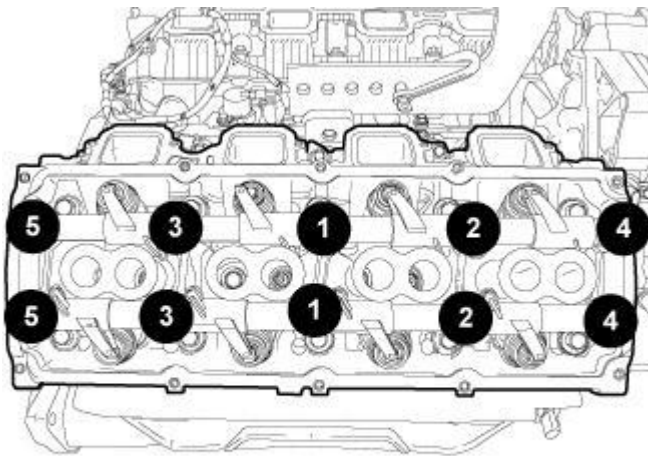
Rocker Shafts Retaining Bolt Removal & Tightening Sequence
